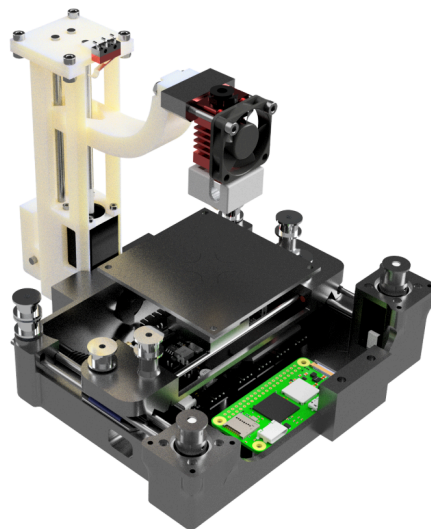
Isometric Render of the Full V-Groove CAD Assembly
